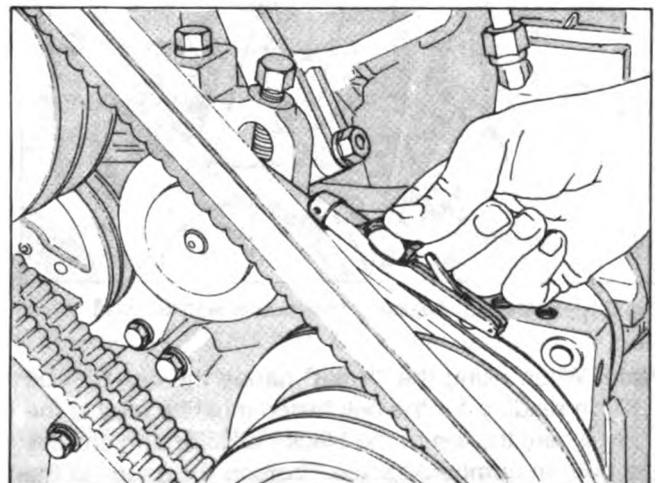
, (OM1014L). Checking belt tension with a Krikit gauge
